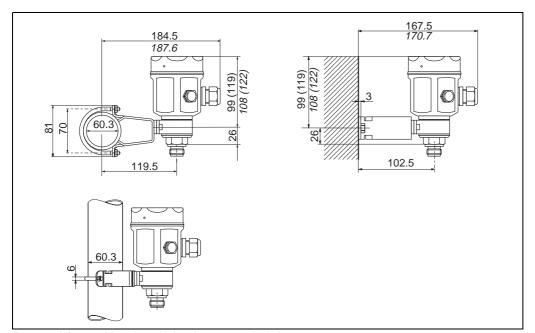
left: Mounting with bracket on a vertical pipe right: Mounting with bracket on a wall
